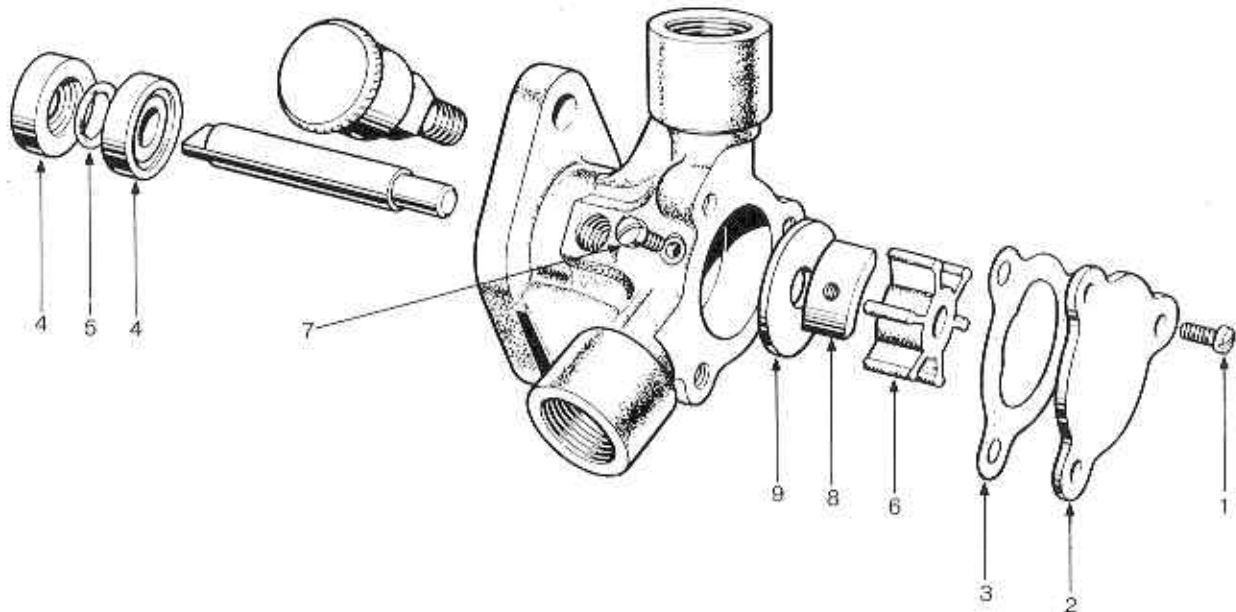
Water Pump (Shaft Driven) : Exploded View
